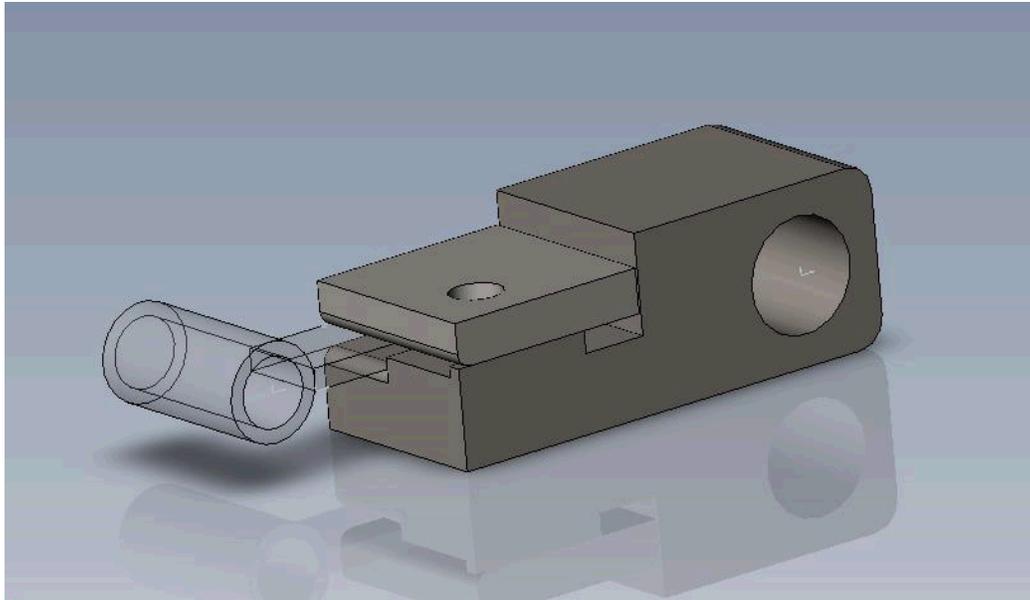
Image of duct and duct holder used to test the Ducted Combustion Chamber
